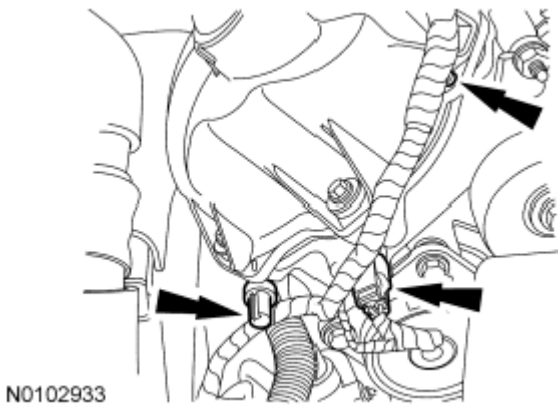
Locating RH CMP Sensor Electrical Connector And Wiring Harness Retainers
